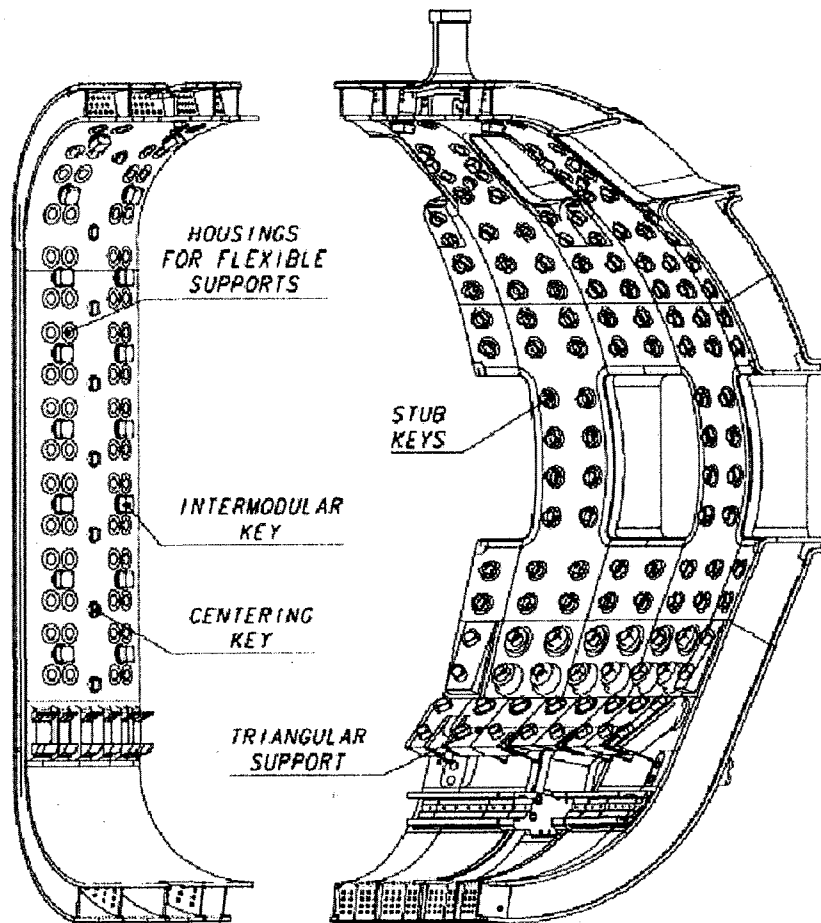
Arrangement of Housings and Keys for Attachment of the Blanket Modules
